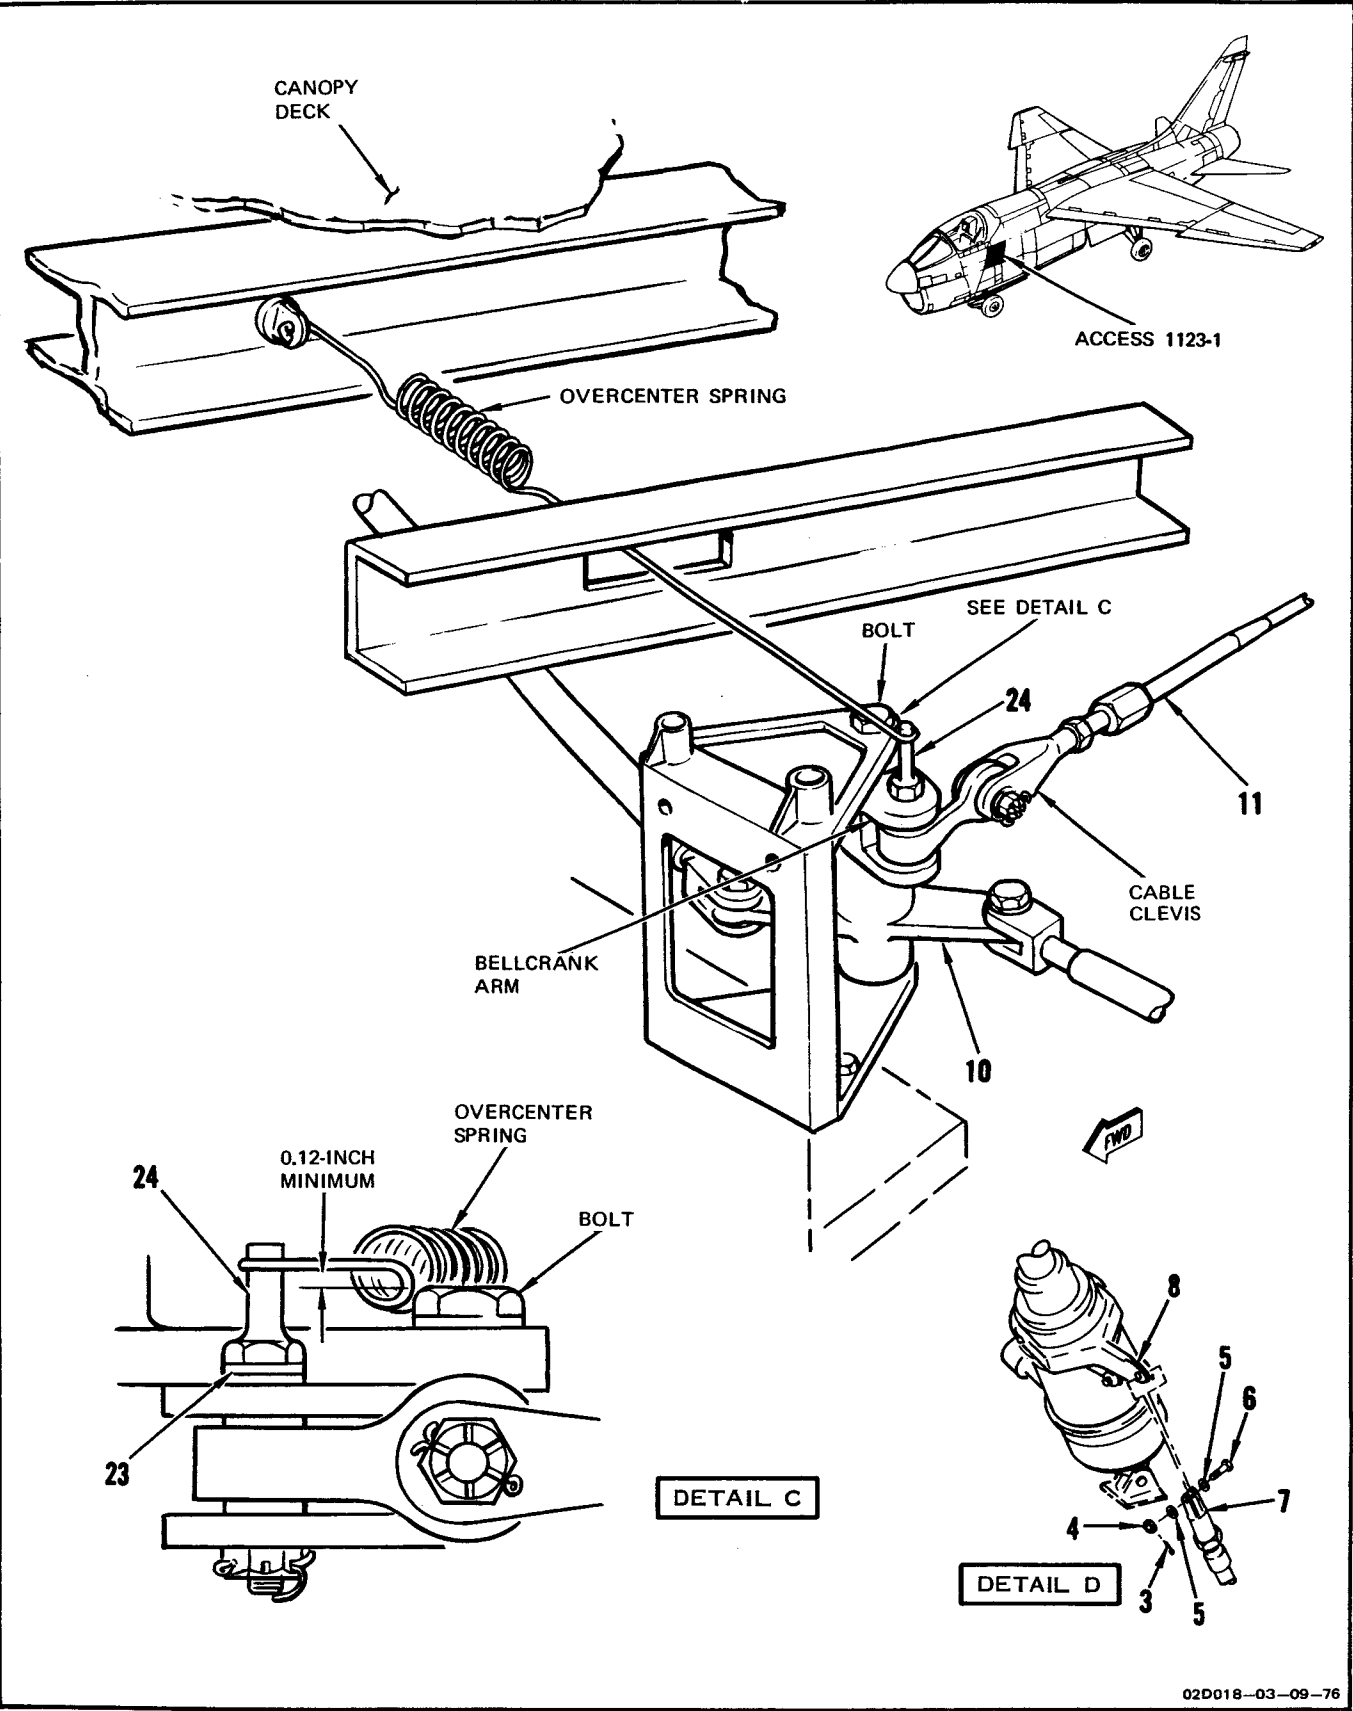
Canopy Roller and Release Mechanism Adjustment (Sheet 3)
